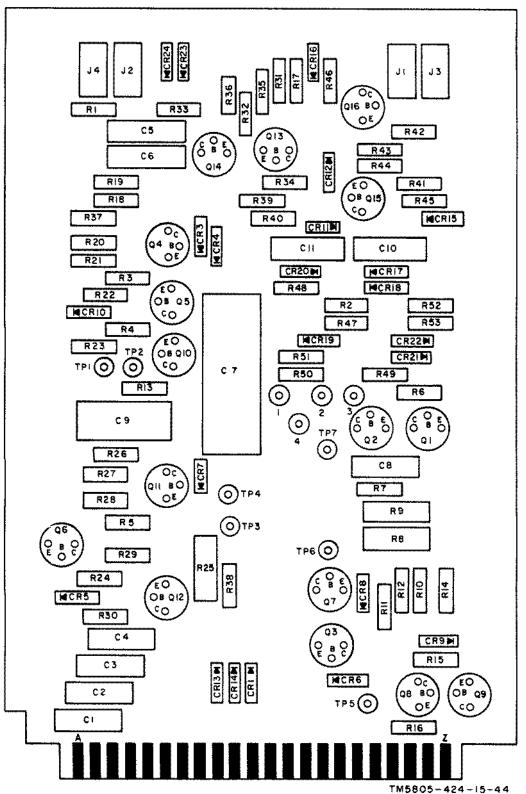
Printed-circuit card assembly A11 (PC 80034030), component location diagram.
